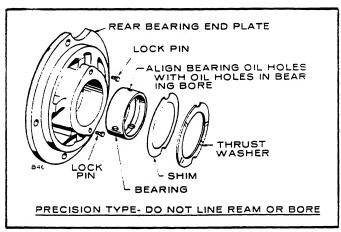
BEARINGS FOR REAR BEARING PLATE
